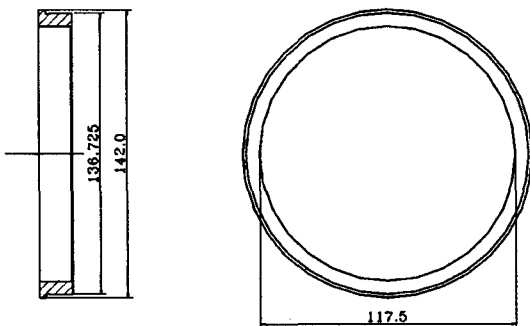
Drawing of rotor blanking die generated in die-layout module
